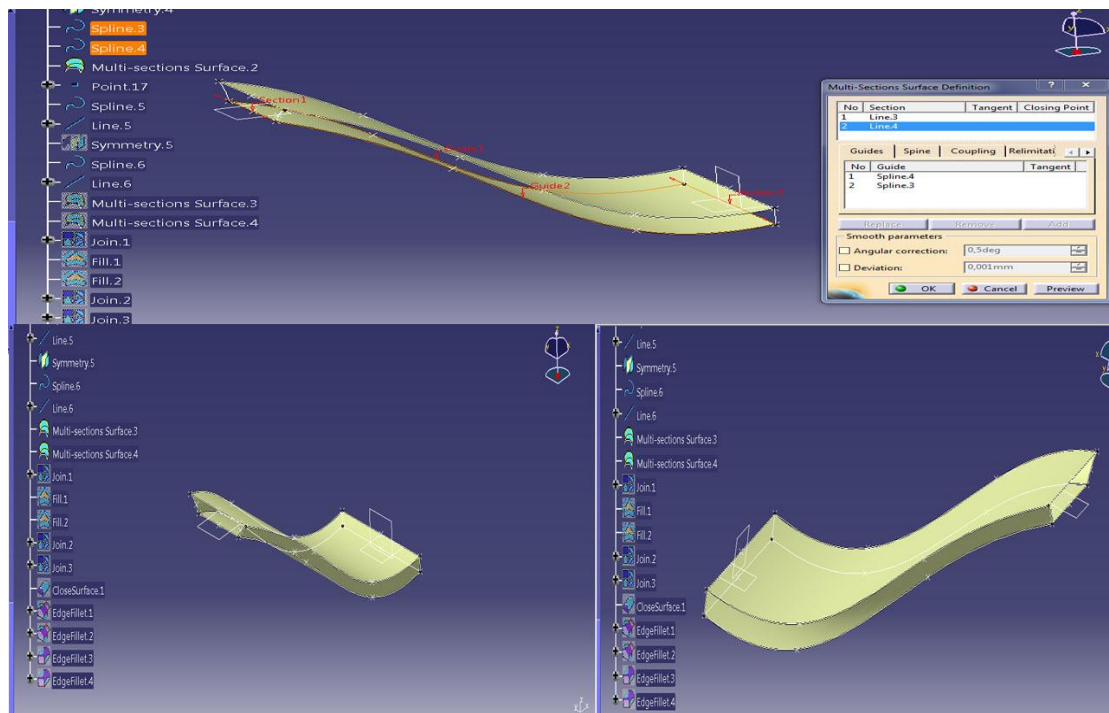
Creation of push rod's pedal bracket multi section surface.
